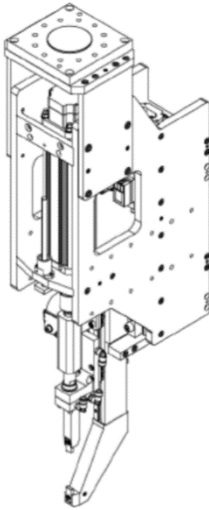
Arplas servo actuated C-type robotic welding gun.
